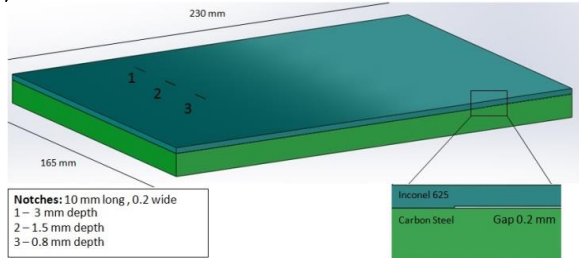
Cross section of the sample, clad metal used to produce of petrol pipeline
